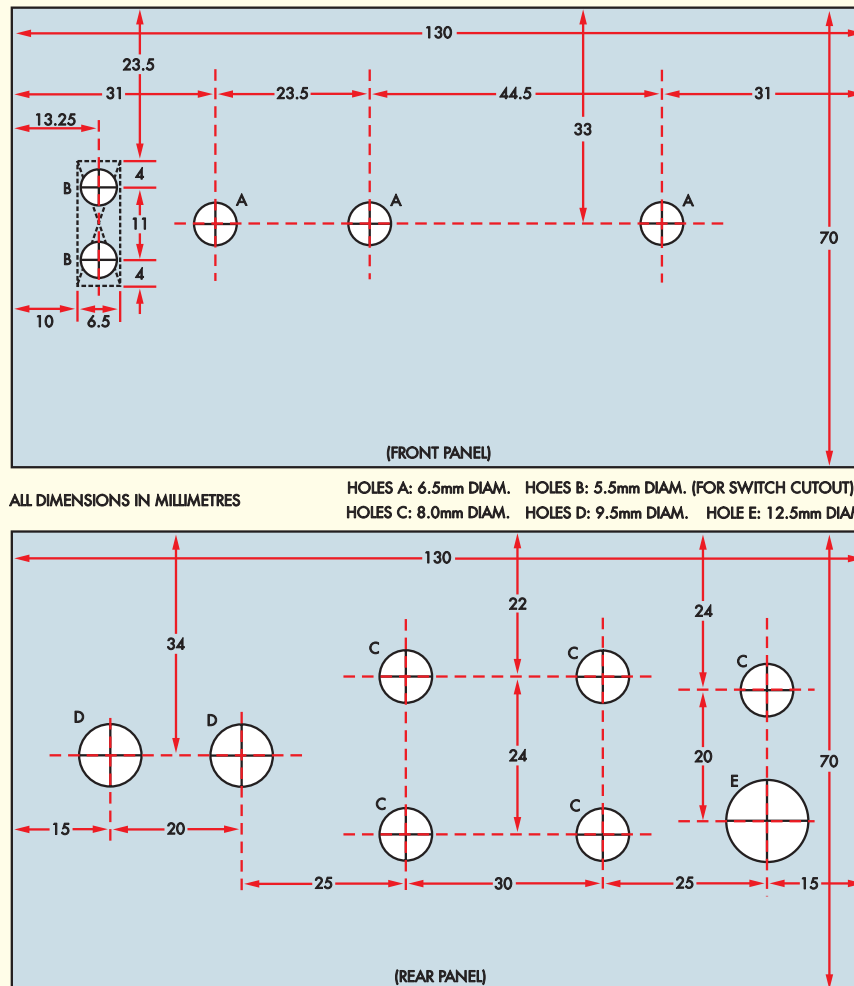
full-size drilling templates for the front and rear panels. Centre-punch each hole position and drill small pilot holes before carefully enlarging them to size using progressively larger drills and a tapered reamer.
